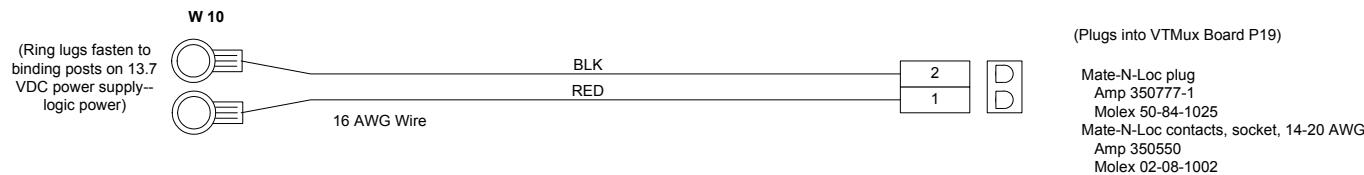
13.7 VDC POWER SUPPLY TO 8051 VTMUX BOARD P19
